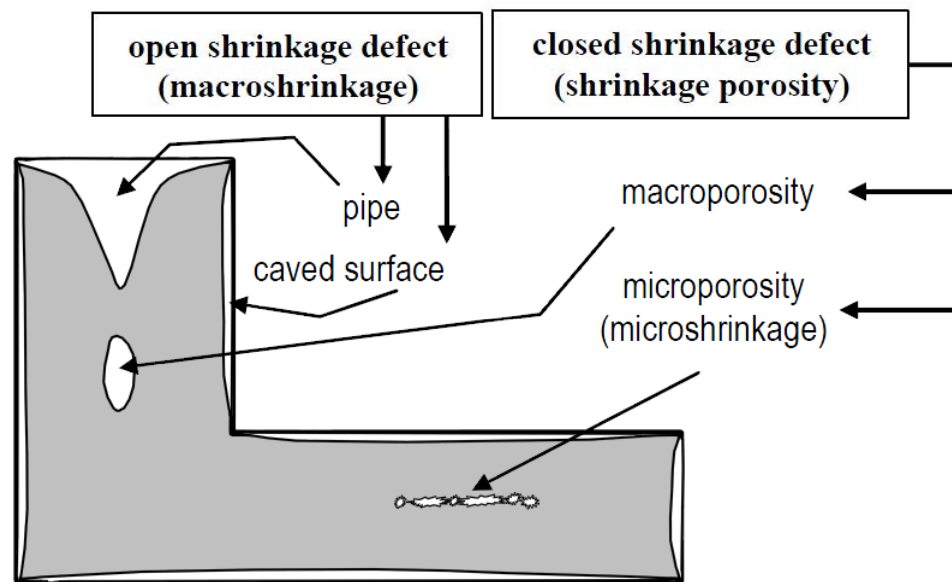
Some common defects in castings: (d) shrinkage cavity
